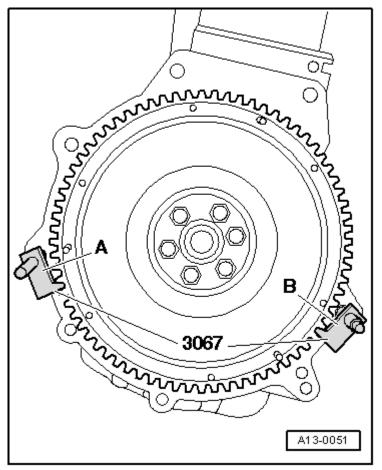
Identifying Retainer -3067- Inserted In Hole On Cylinder Block Courtesy of VOLKSWAGEN UNITED STATES, INC.
